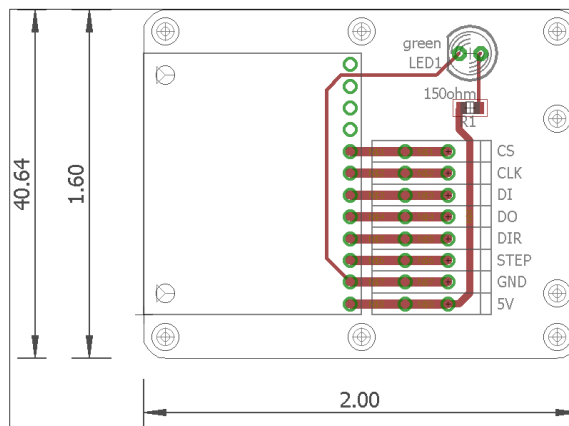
Eagle board diagram of the AMIS 30543 Motor Driver Shield.
